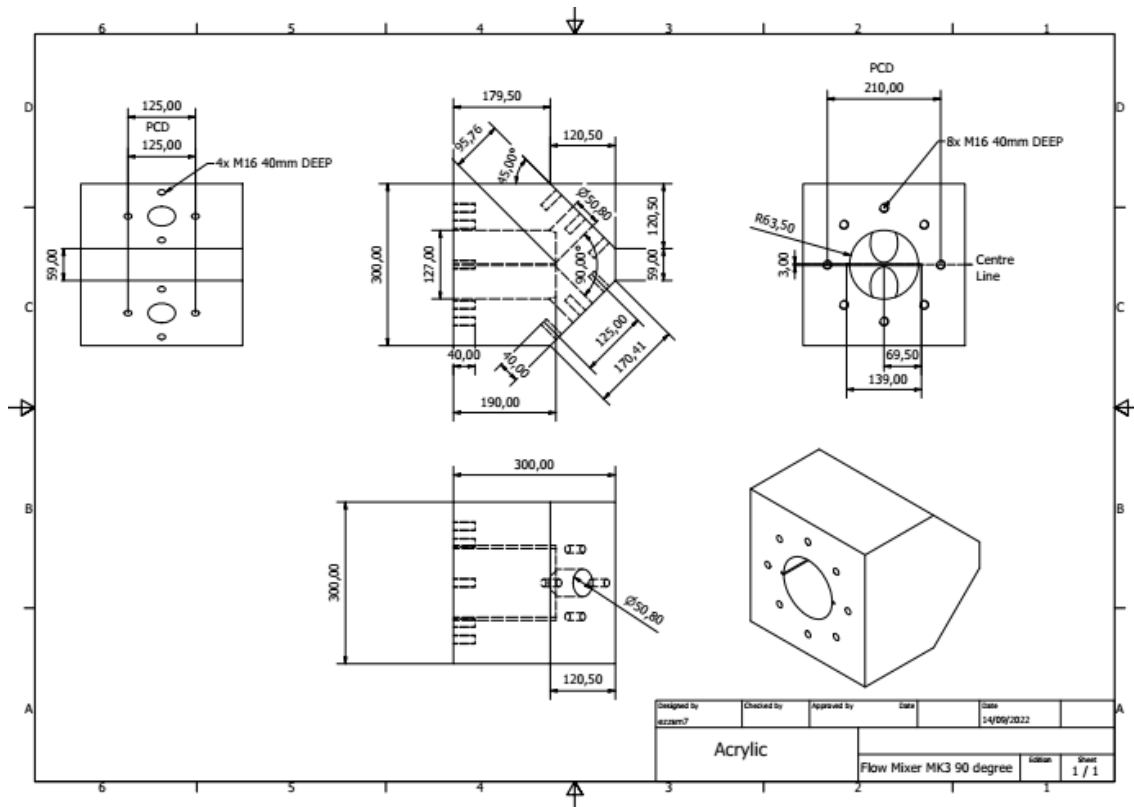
An engineering drawing of the fluid inlet device with relevant dimensions.
